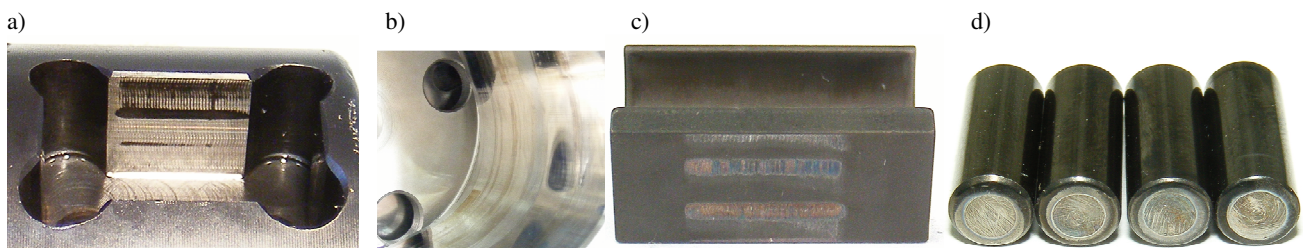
Traces of abrasive or fretting damage observed on the working surface of high-pressure pump components: a) side guiding walls of follower seats in the pump body, b) raceway of internal cam ring, c) side follower walls, d) front piston surfaces
